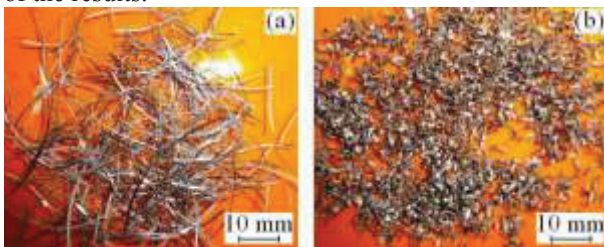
INCONEL alloy machined chip waste with different types of shape.
